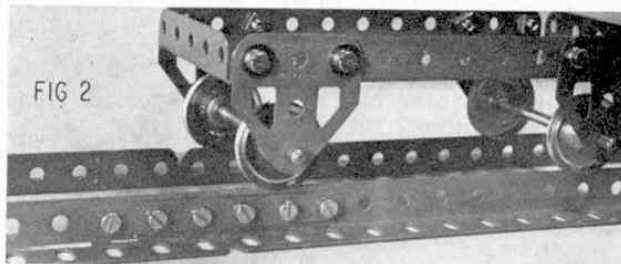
A simple method of making a non-bulge joint in strip rails for pulley wheel running gear.
